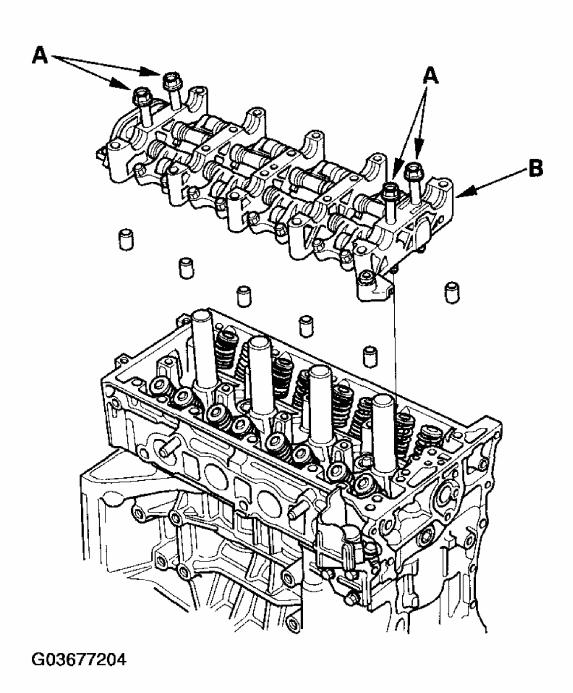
Removing Rocker Arm Assembly Courtesy of AMERICAN HONDA MOTOR CO., INC.
